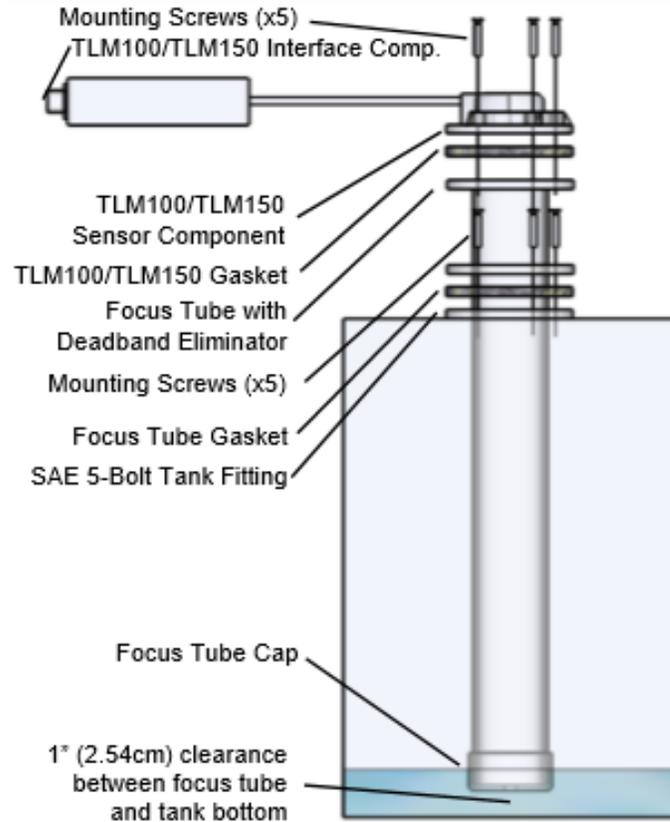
Mounting TLM100/TLM150 and Focus Tube with Deadband Eliminator (TFTDBE-5H) to SAE 5-Hole Tank Fitting
